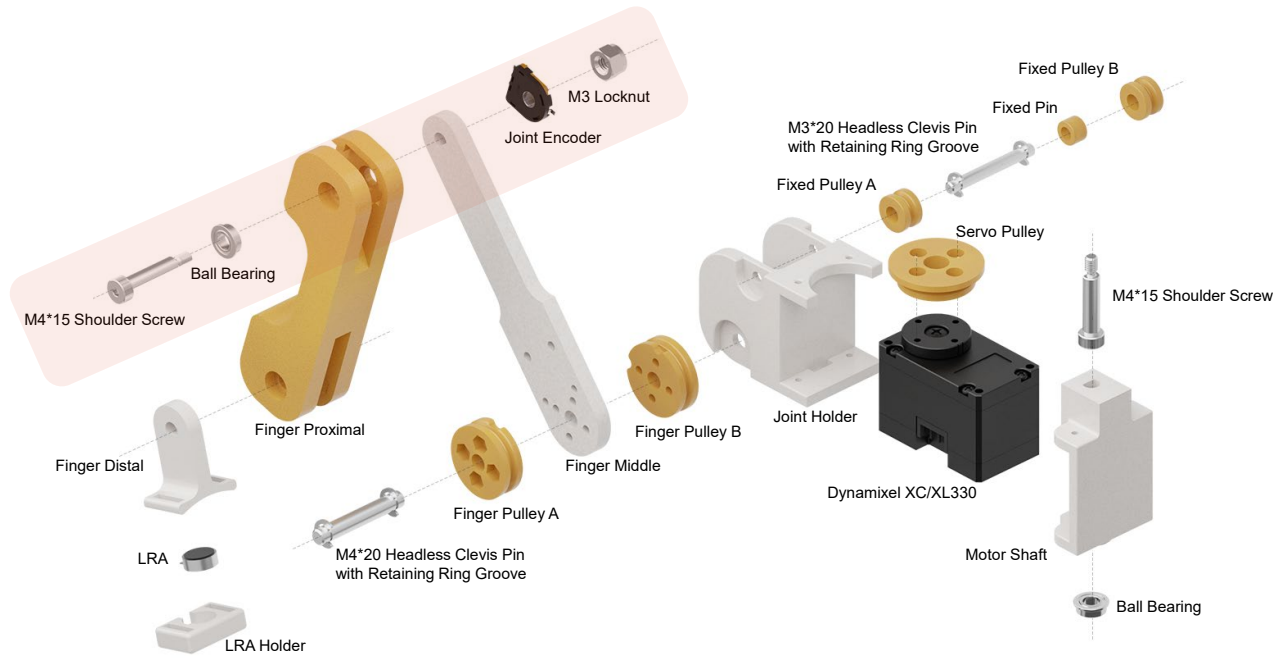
Exploded view of the finger assembly, with the highlighted area indicating the basic components of a rotary joint.
